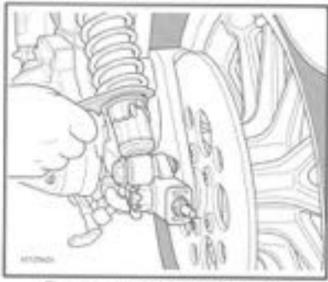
Adjast Shock Absorber Spring Adjusting Cams
